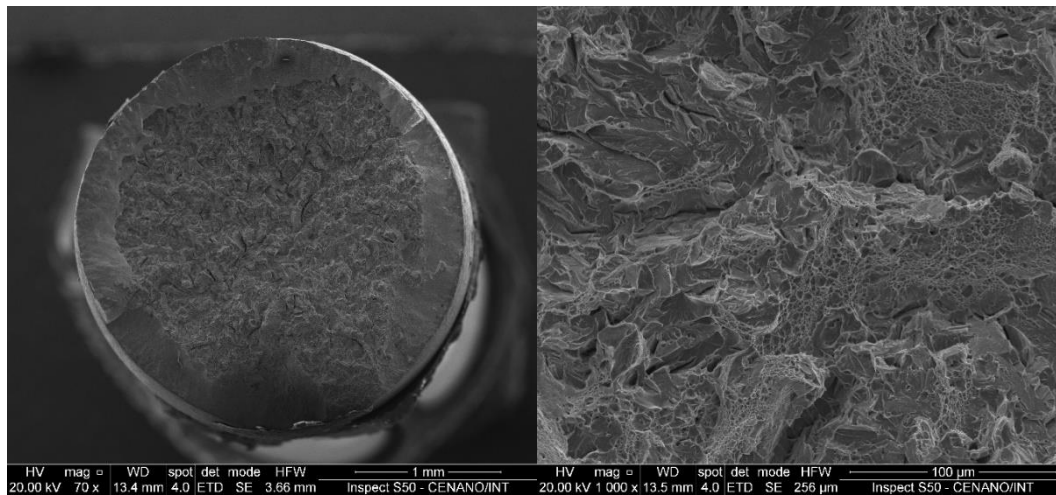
SEM analysis of the fracture surface of a specimen tested in air, Tensile test results.
